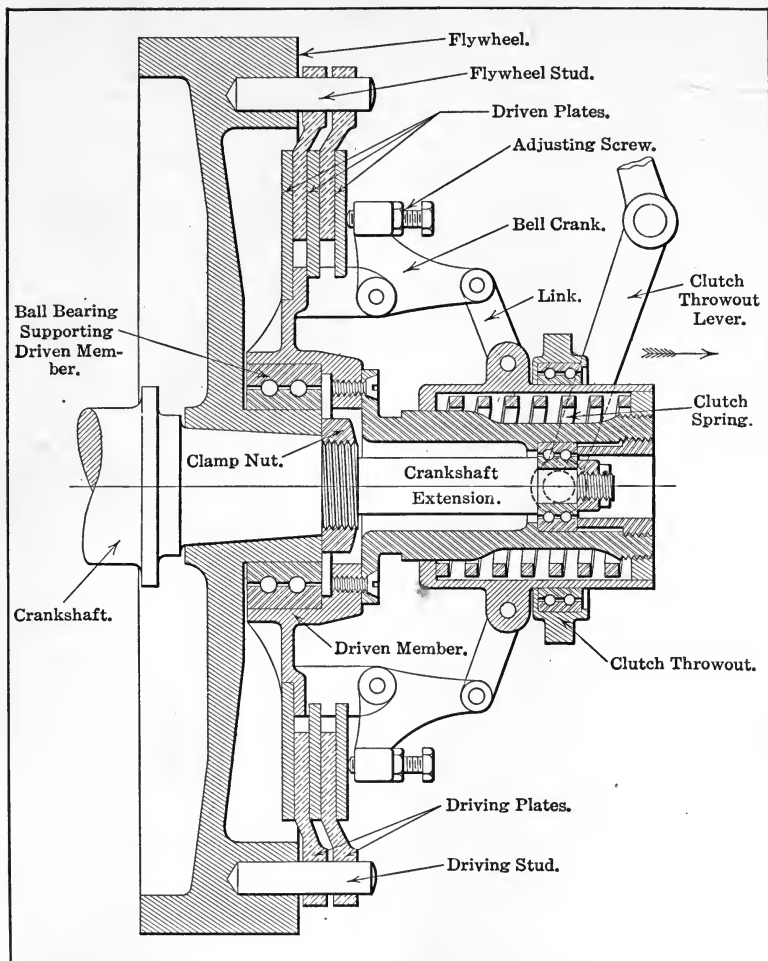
Five-Plate Clutch which Employs Two Driving Members Attached to Fly Wheel and Three Driven Plates.
